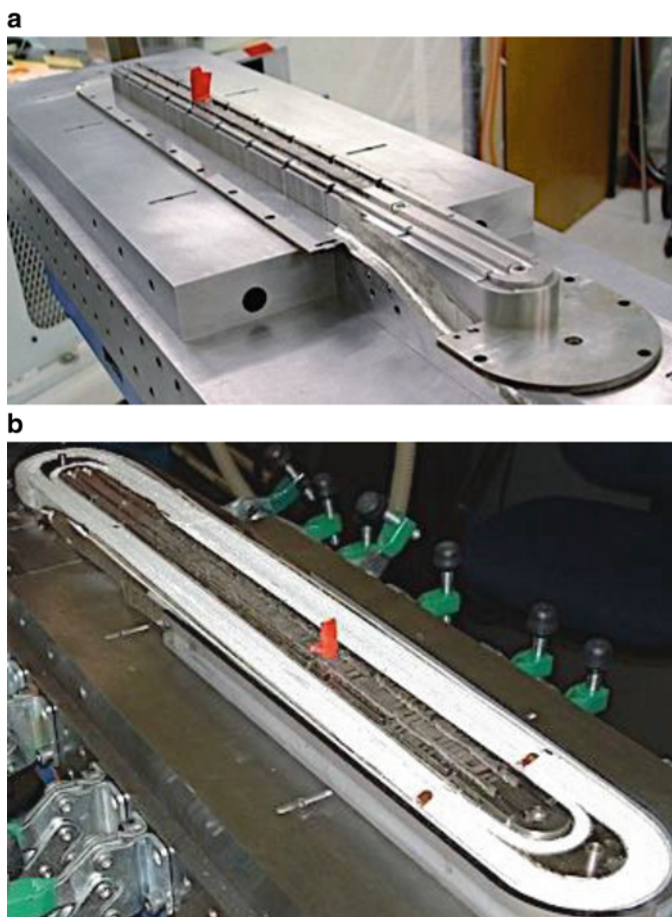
(a) Winding mandrel ready for first turn; and (b) inner winding
